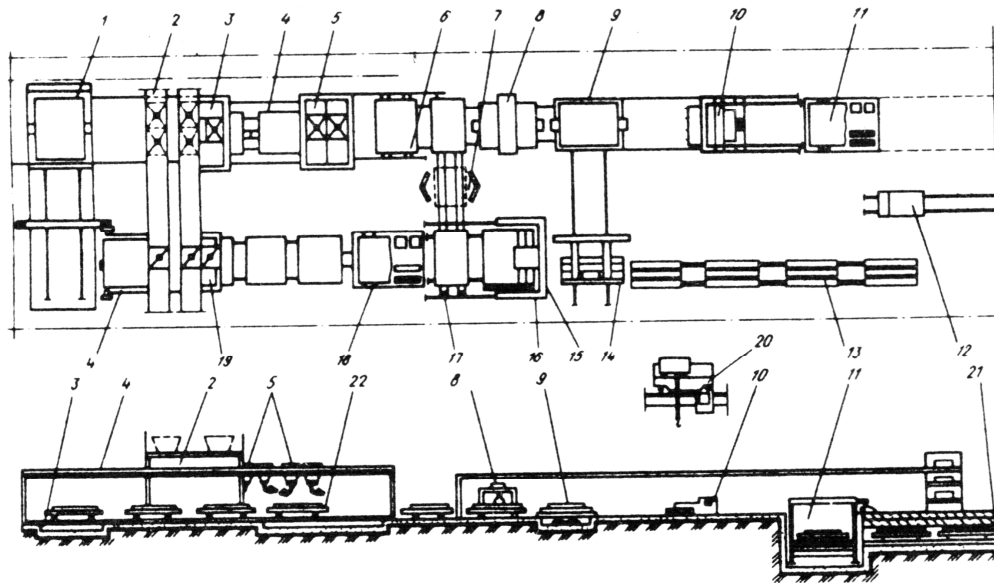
Two-branch line for making outer wall panels (developer and VNIzhelezobeton – All-Russian Scientific Research Institute for Reinforced Concrete): 1 – transfer car; 2 – construction trestle; 3 – suspended concrete paver; 4 – viaduct of concrete paver; 5 – suspended concrete paver; 6 – automated machine for open-closing of sides; 7 – hydraulic jack of moulds-trolleys; 8 – machine for cleaning and lubricating of moulds; 9 – turn-over device of moulds-trolleys; 10 – rubbing machine; 11 – elevator-descender (bringer-down); 12 – self-propelling export car; 13 – conveyor for finishing and stand-up of panels; 14 – self-propelled remover of panels; 15 – portal manipulator; 16 – elevator depository of changeable equipment; 17 – transfer bogie; 18 – descender (bringer-down)-elevator; 19 – mortar paver with smoothing body; 20 – overhead type electric crane; 21 – slit-type camera of thermal treatment; 22 – vibratory plate.
